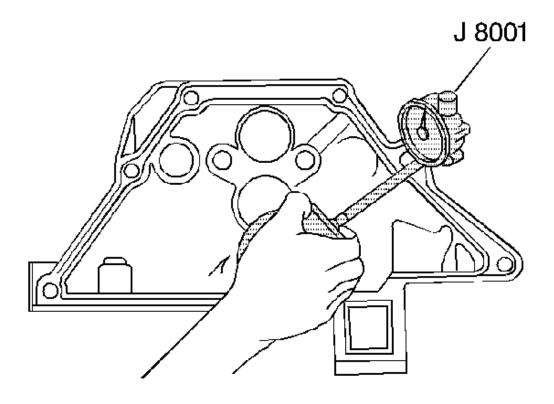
Inspecting Mating Surfaces Of Transmission Case Courtesy of GENERAL MOTORS CORP.
